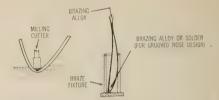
Blade trailing edges are brazed together in this simple fixture.
